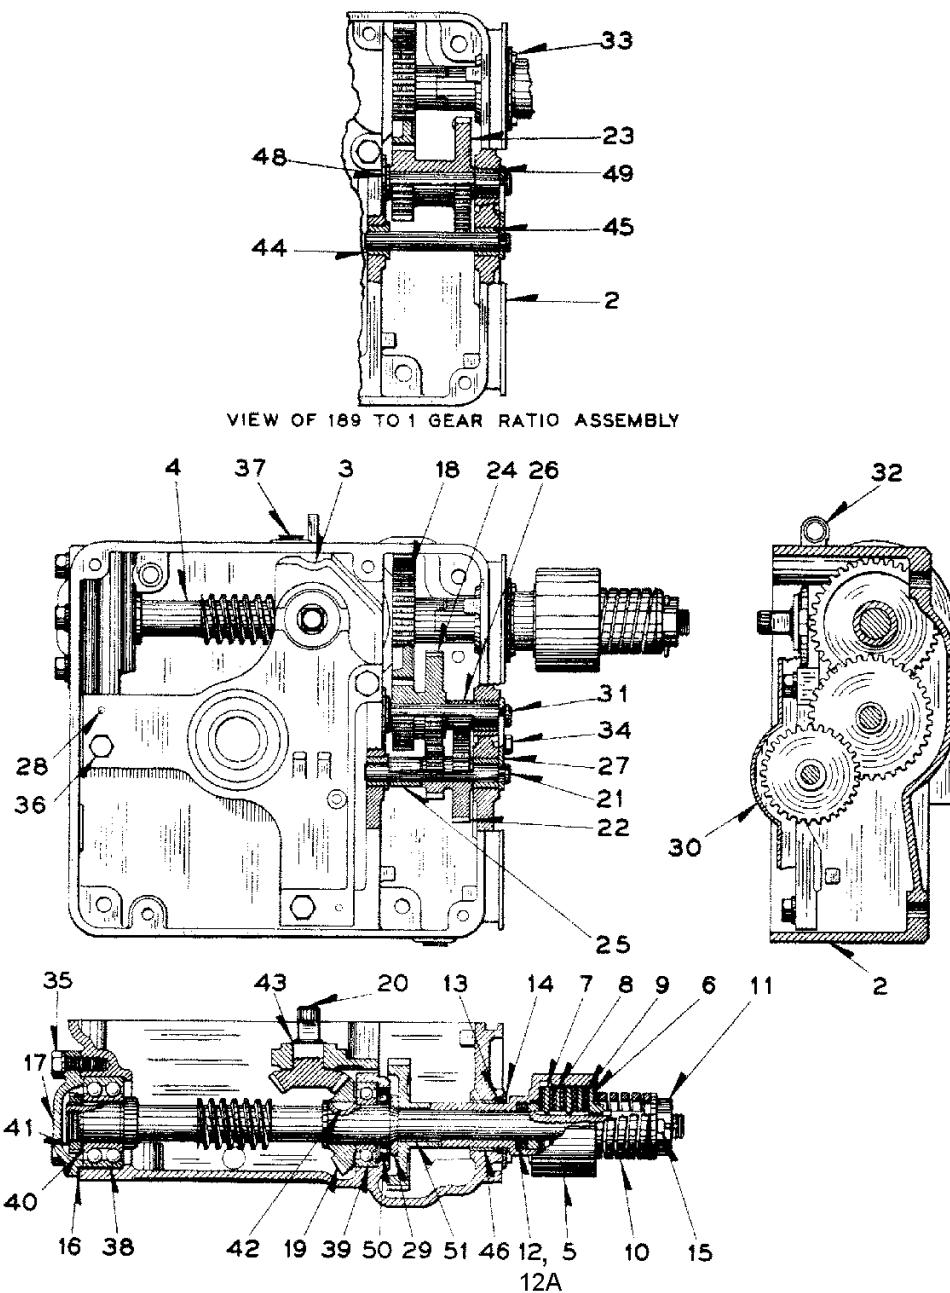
M-3 Switch Machine Gear Box Parts Location
